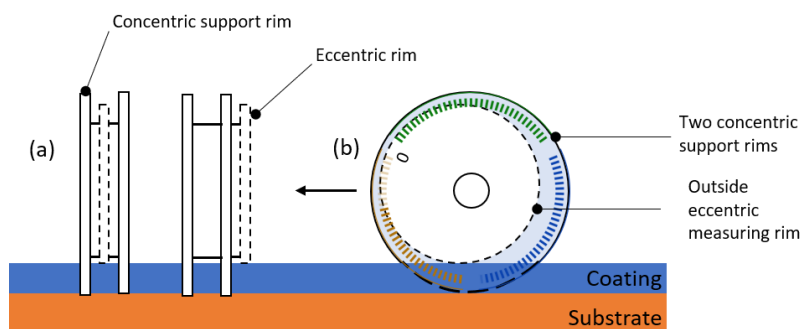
(a) A simplified view to show the positioning of the concentric and eccentric circles in two versions of wheel gauges. (b) An exaggerated view of a wheel gauge showing the eccentric rim relative to the concentric rims.
